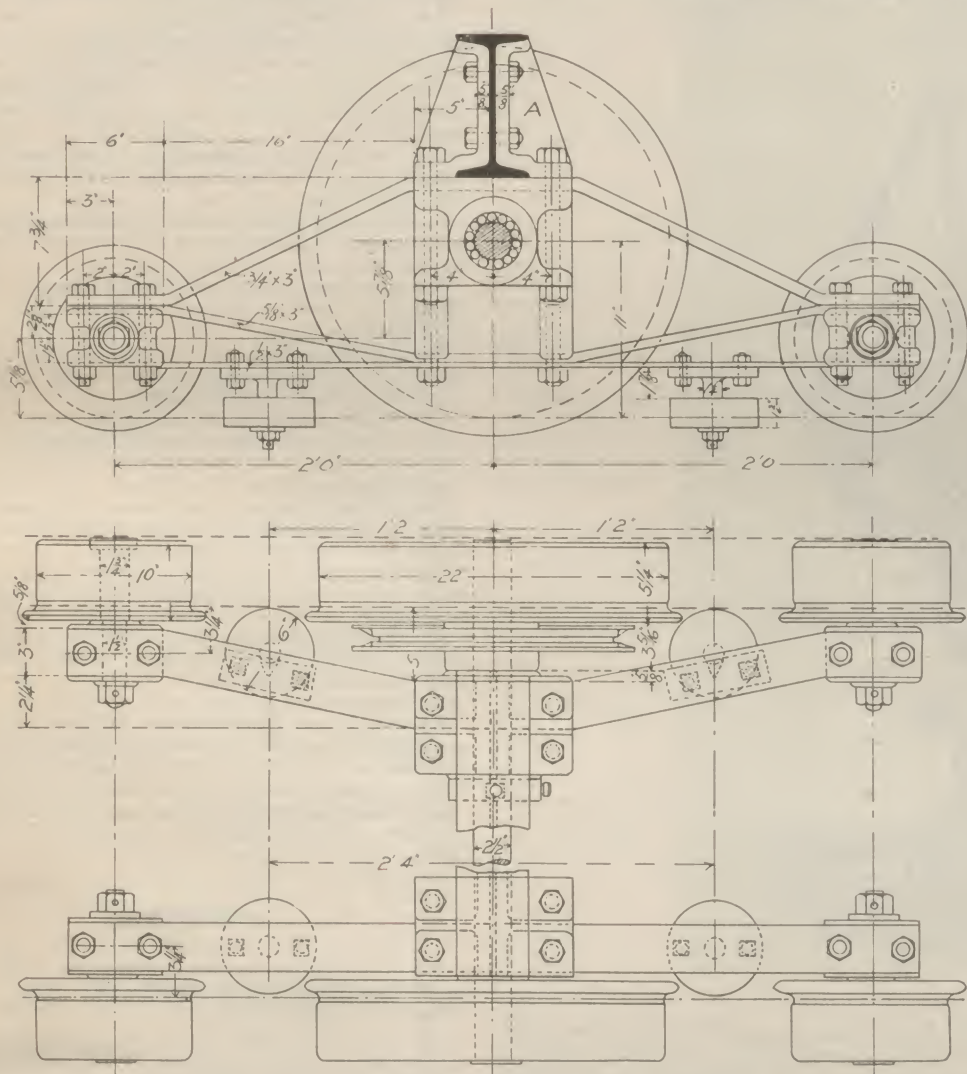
PLAN AND ELEVATION OF TRUCK.
